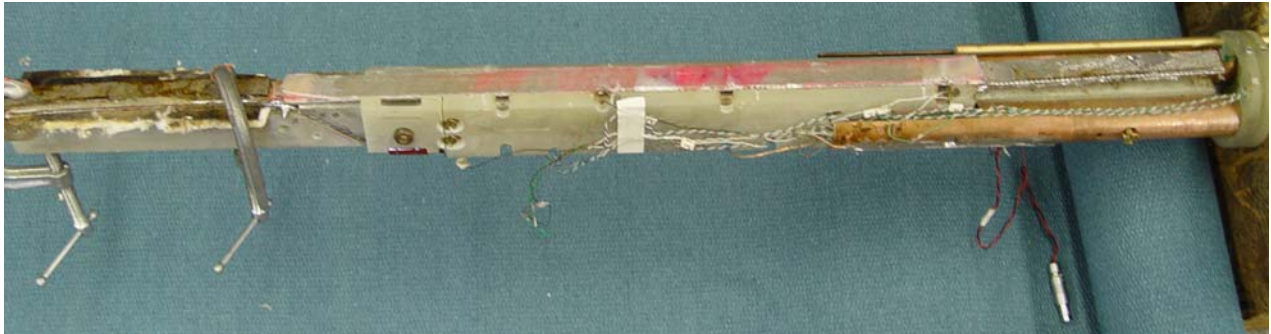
Clamping pressure is increased appropriately during soldering of the top and bottom splices. The SS bar is visible on the bottom splice.
